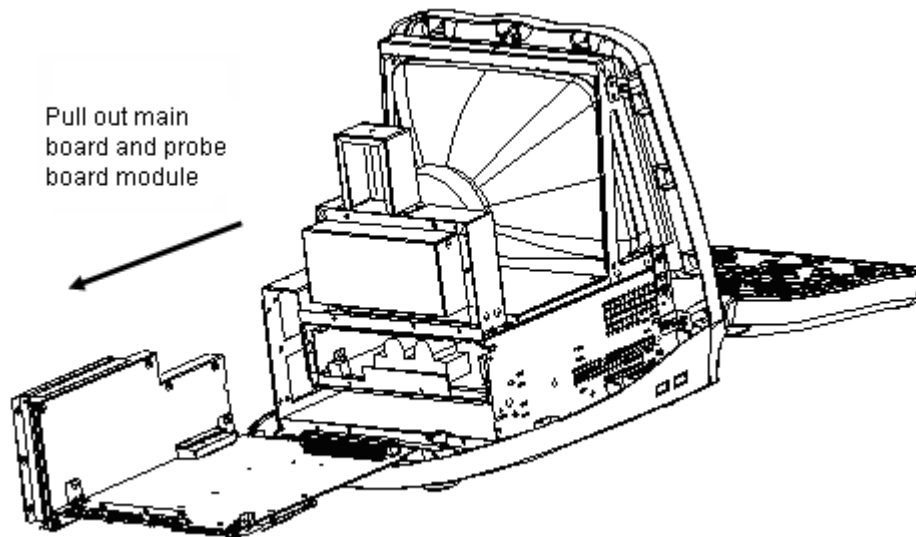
Sketch Map of Probe Board and Main Board Disassembly (3)
